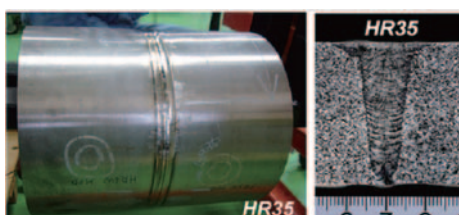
Boiler Pipe Welding Test⁽³⁾
